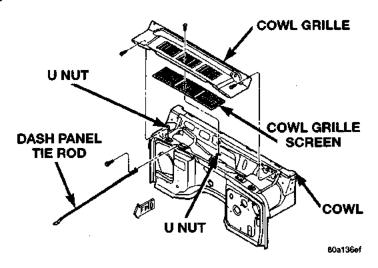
Cowl Plenum Cover/Grille Panel Remove/ Install
